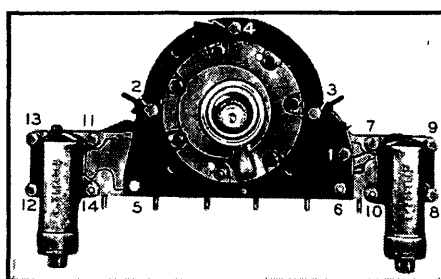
Reaction shaft flange and accumulator bolt tightening sequence
